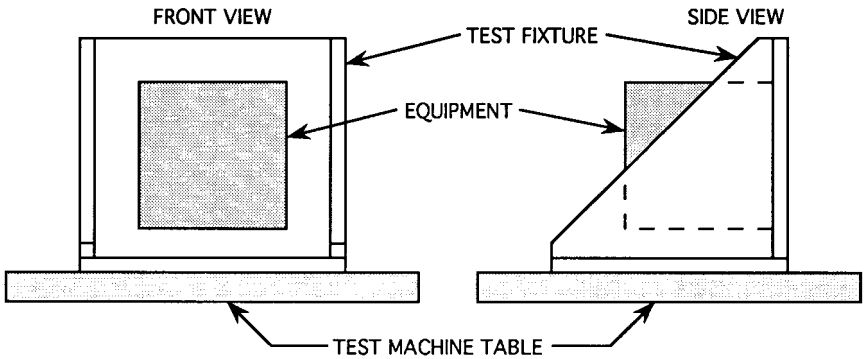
Test fixture to deliver excitation in the plane of the equipment mounting points.
